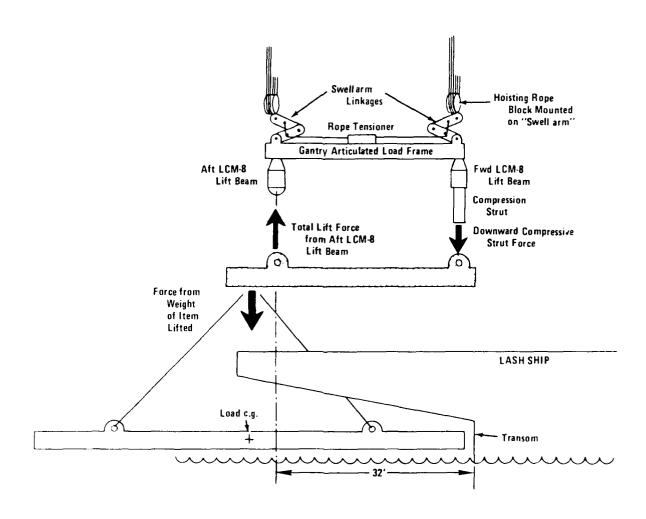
SCHEMATIC DRAWING SHOWING FORCES ACTING ON THE CAUSEWAY LIFT FRAME (Shaded area is the causeway lift frame.)
